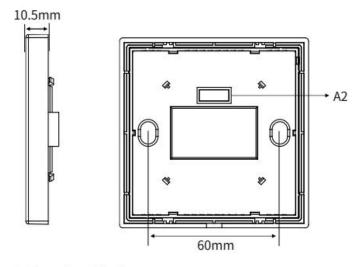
Dimensions - Side View Figure 5. Dimensions - Back View
